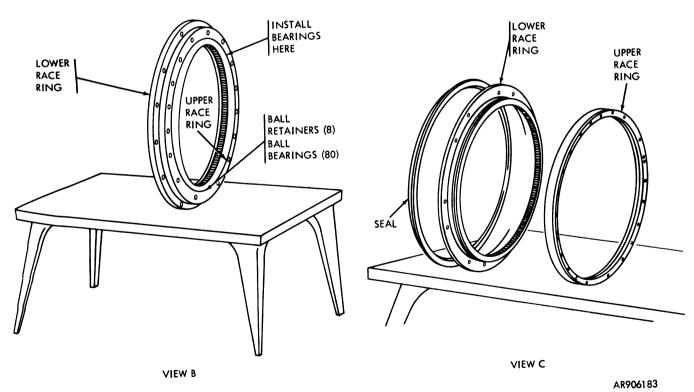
Low-profile cupola bearing race disassembly or assembly (vehicles serial numbered A1001 thru A1999 and A3375 thru A3999).
